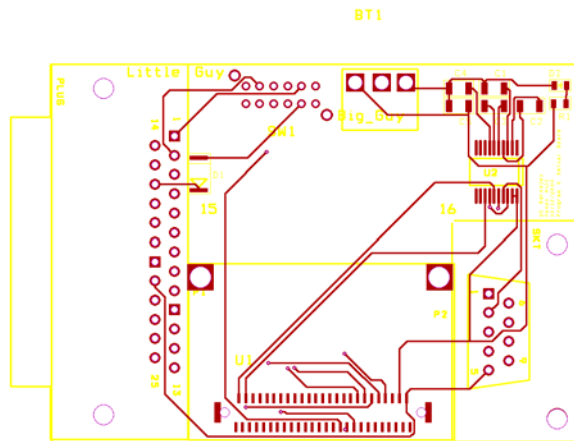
Top layer PCB layout for the Rene programming board.
